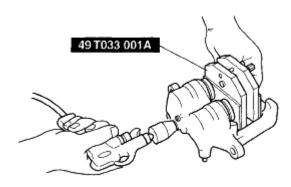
Identifying SST In Caliper Courtesy of MAZDA MOTORS CORP.
